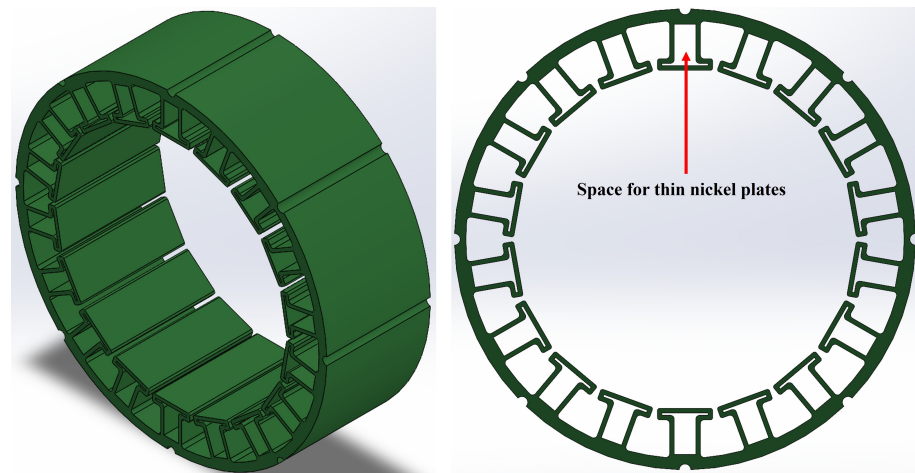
A 3D CAD model of the stator: (left) isometric view; (right) top view showing the hollow stator teeth designed for thin nickel plate insertion.
